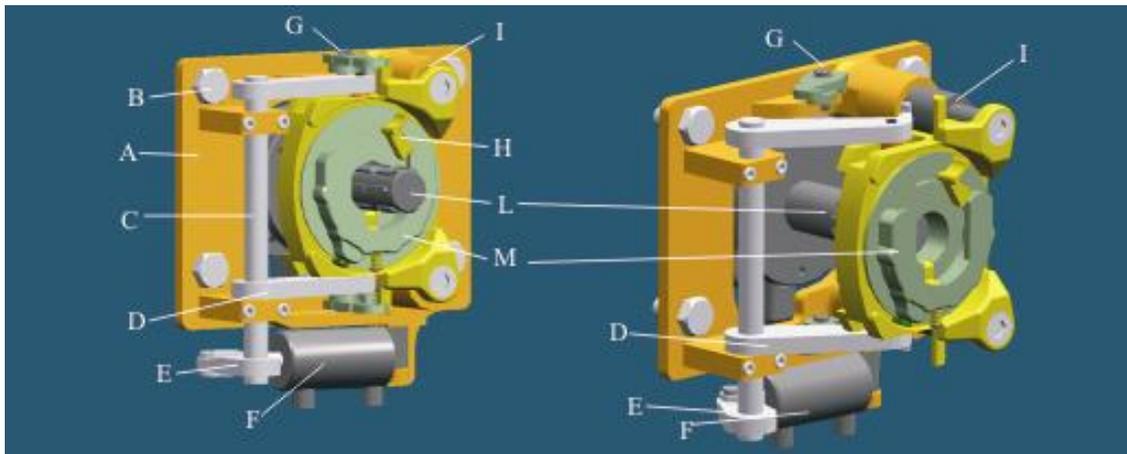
Sketches of the MR-device closed (left) and open (right), without PTO-drive shaft. A) support plate; B) fixing bolt; C) drive pivot; D) drive lever; E) drive crank; F) hydraulic cylinder; G) locking levers; H) wing-nut that lock the drive-shaft; I) telescopic guide bearings; L) PTO tang; M) PTO-drive shaft U-bracket
